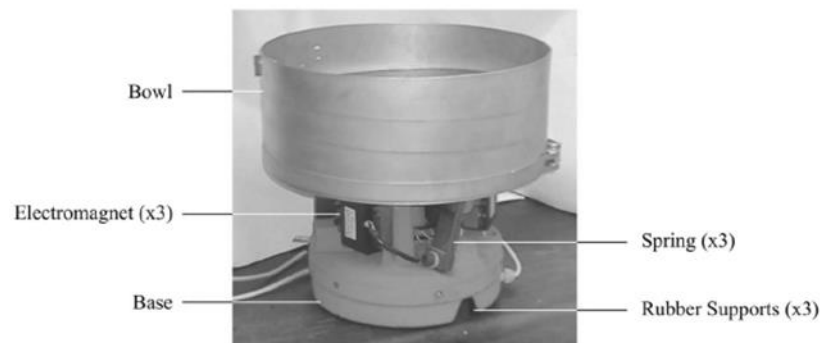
Layout of Vibratory Bowl Feeder (Silversides, Dai, & Seneviratne, 2004)
